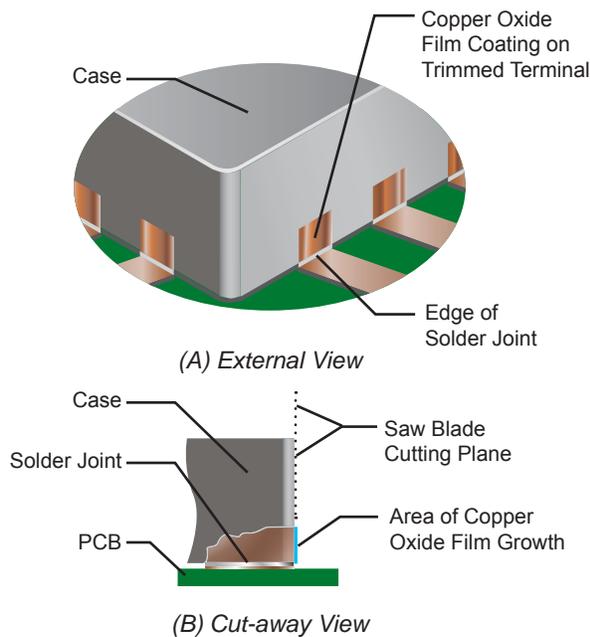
QFN and SON Solder Joints. The saw blade cut or scored break edge leaves exposed copper in those designs where the terminal material extends to the edge of the package case after singulation.
